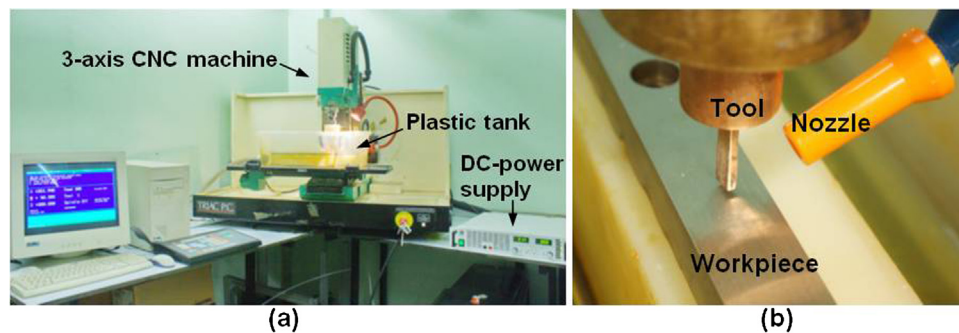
(a) Three-axis ECM milling machine and DC power supply and (b) The tool, workpiece and nozzle.
